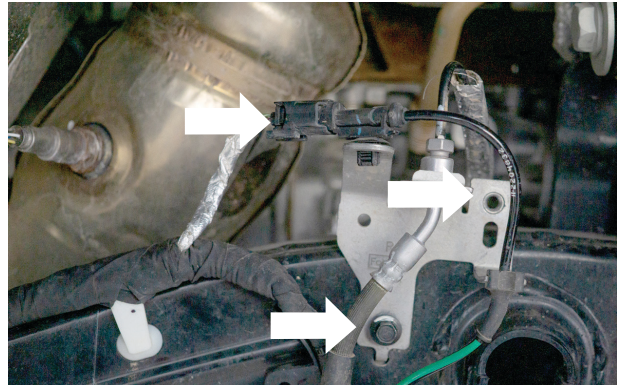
Disconnect the ABS wire and remove the brake line bracket bolts.
